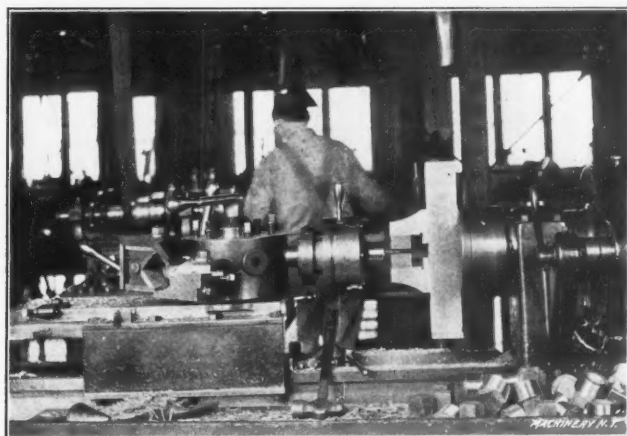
Lathe equipped for Machining Brass Taper Plugs
